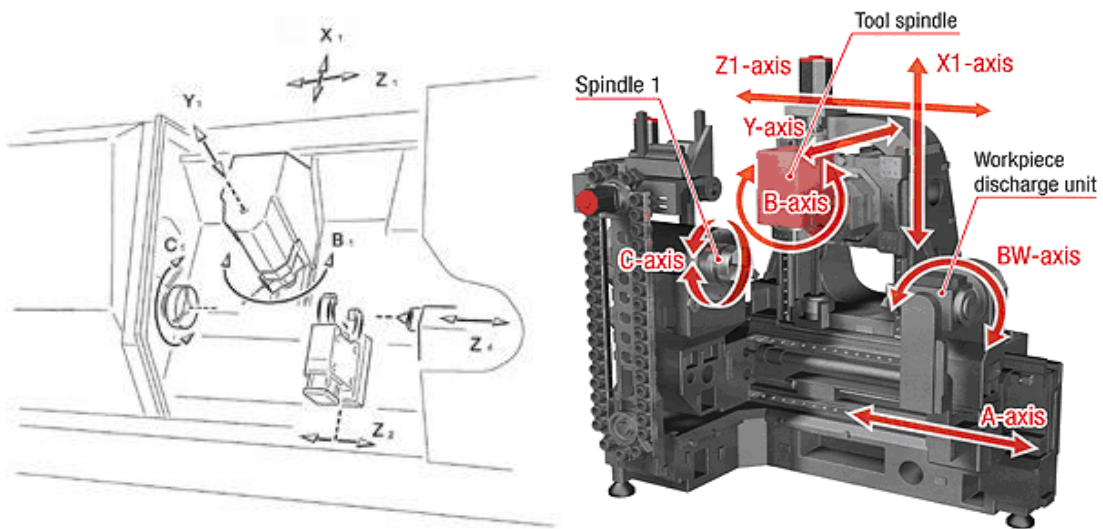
Axis representation in multi-purpose machine tool [5]
